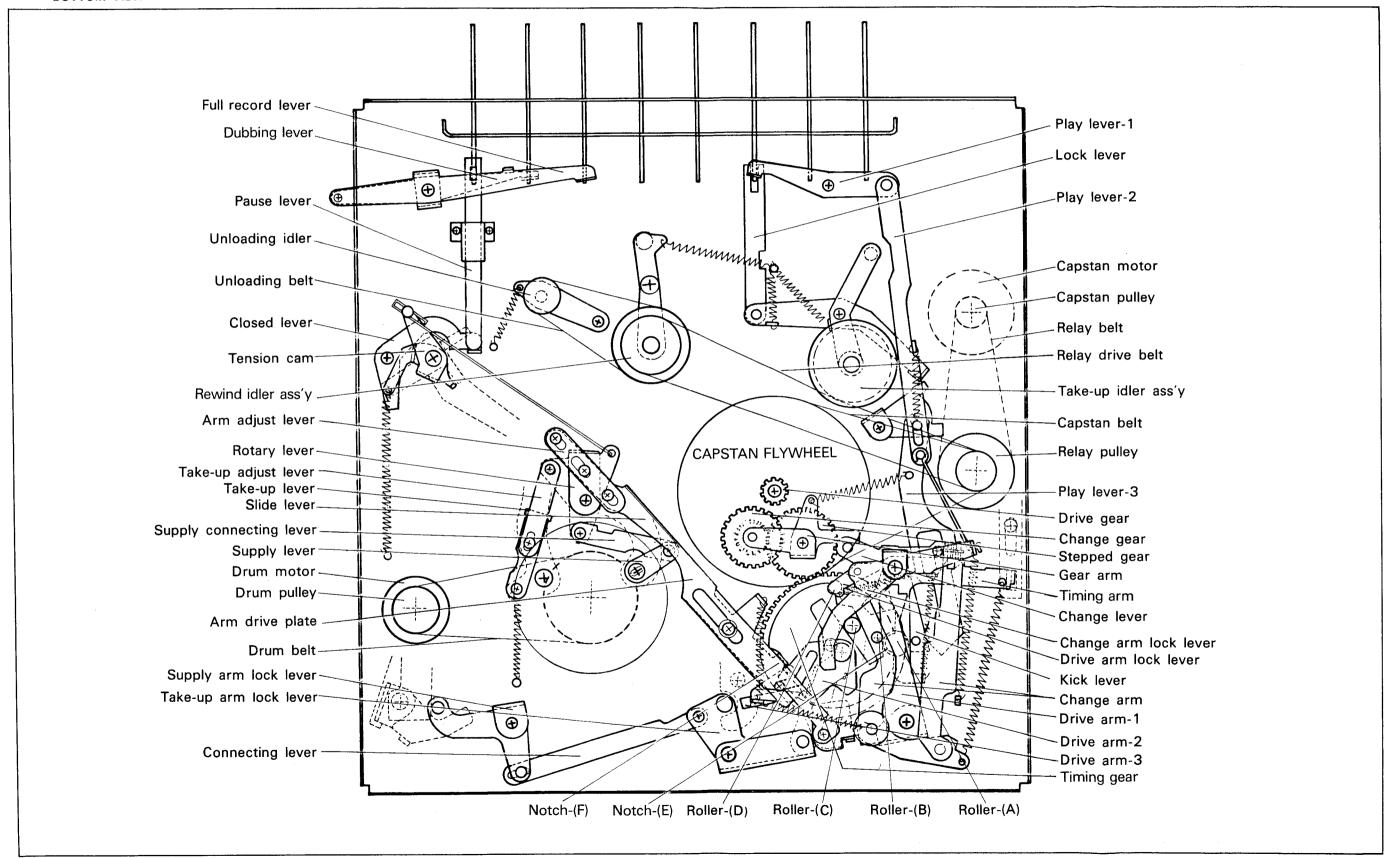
(b) Stop mode mechanism (BOTTOM VIEW)
